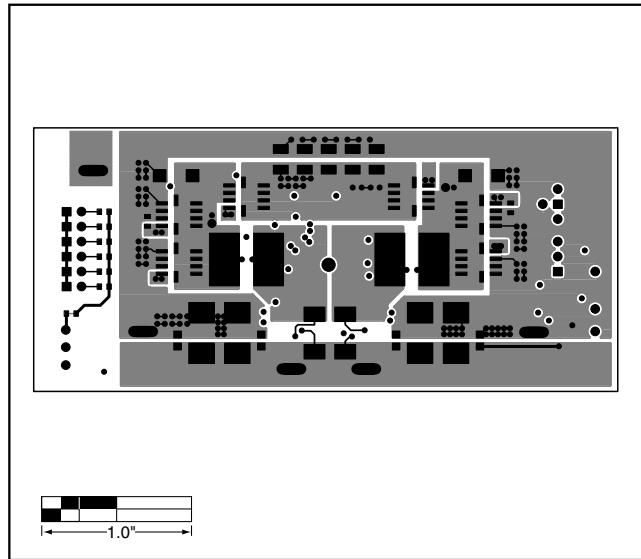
MAX8760 EV Kit PC Board Layout—Component Side
